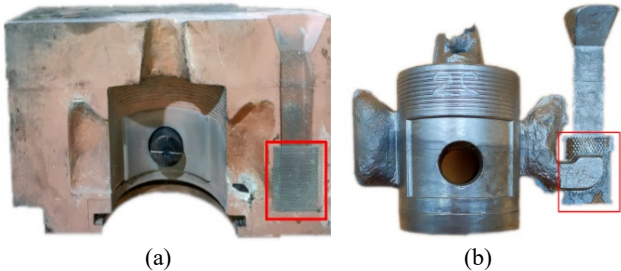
Filter mesh position: (a) casting mould, (b) casting
